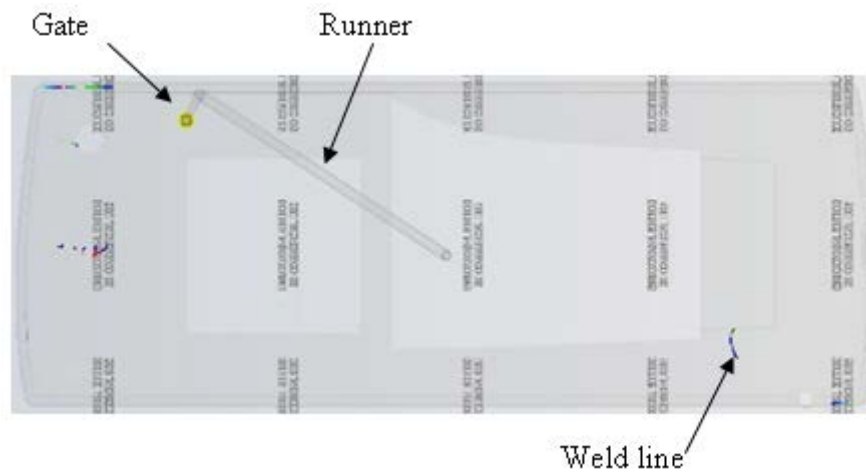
Weld lines produced at the injection pressure of 220 MPa
